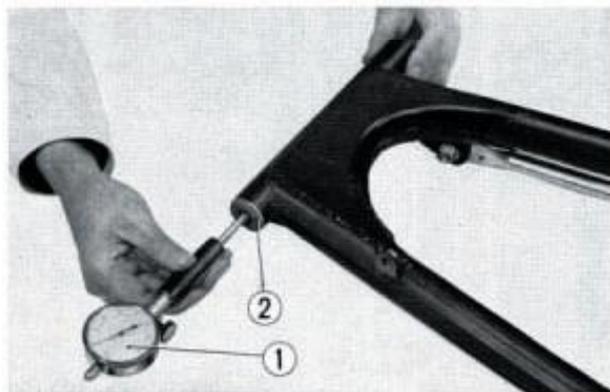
① Inside dial gauge ② Rear fork bushing
